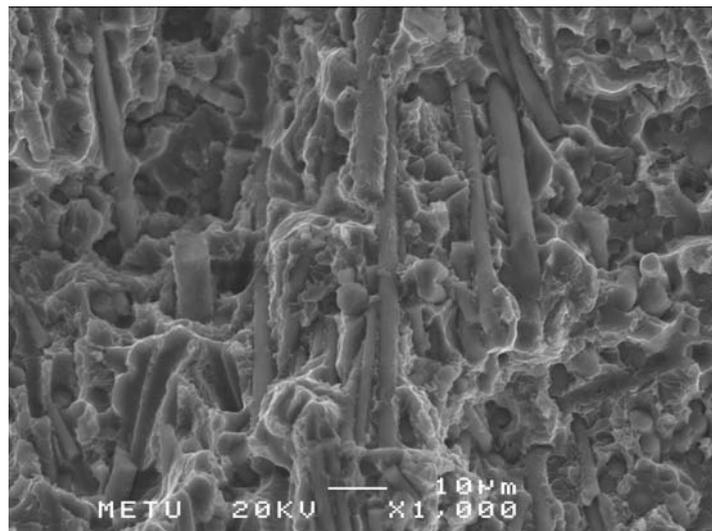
Fracture surface of AlSi10Mg0.8/20vol%Al₂O₃ reinforced composite squeeze cast at 750 °C
